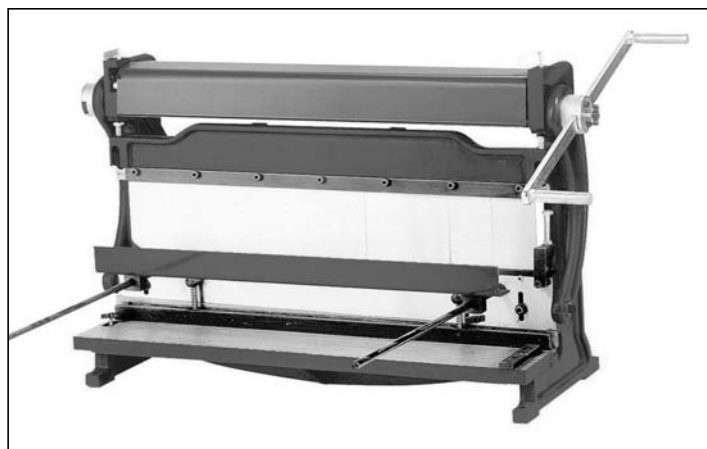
The Harbor Freight 3-in-one shear, brake and roll.
